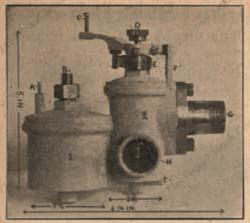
HALF-TONE VIEW DYKE CARBURETTER retter made.
